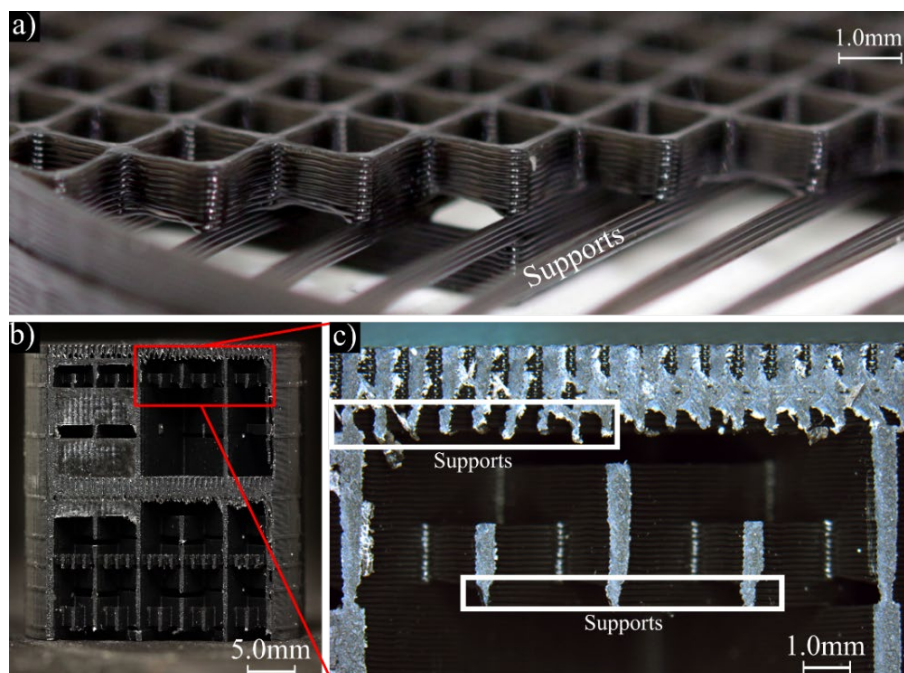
Manufacturing of multilayered microchannels: a) detail of small channels (0.6mm) printed over 0.4mm-thick supports; b) interior of a cut 30mm-thick acoustic sample with 30-layers; c) detail of the upper part of the cut sample
